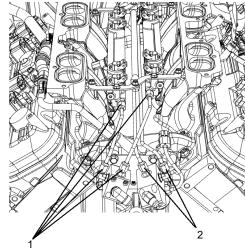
Rear Engine Fuel Supply (1) and Engine Fuel Return Lines (2)
